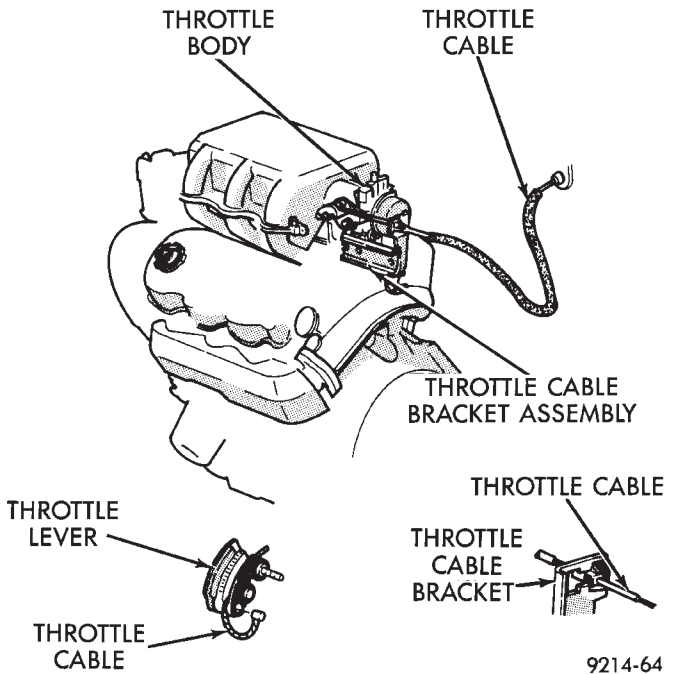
Throttle Cable Attachment to Throttle Body Attachment—3.0L Engine
